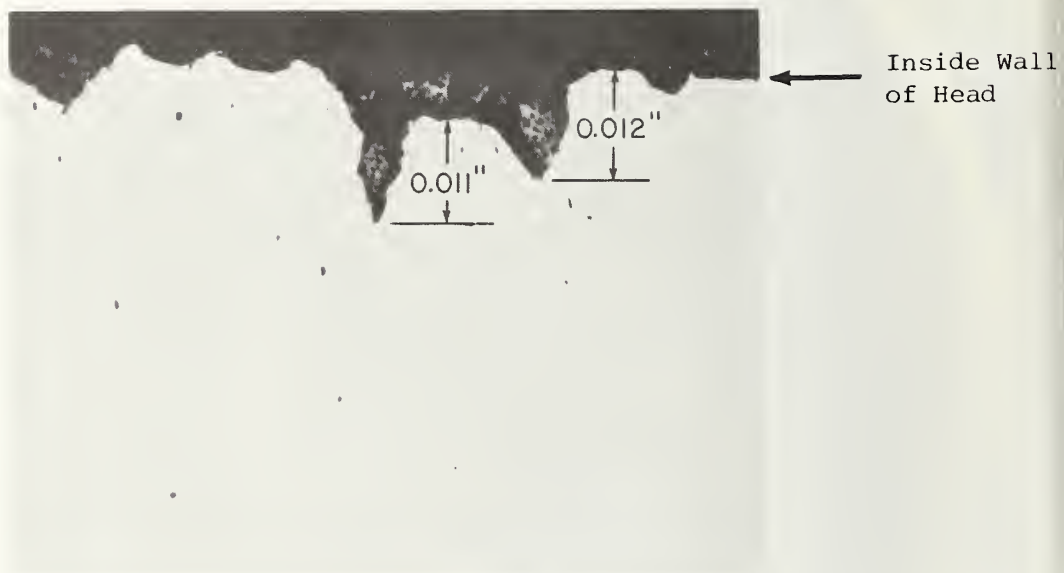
Cross-section of typical forging seams found in front head of cylinder 10041.
